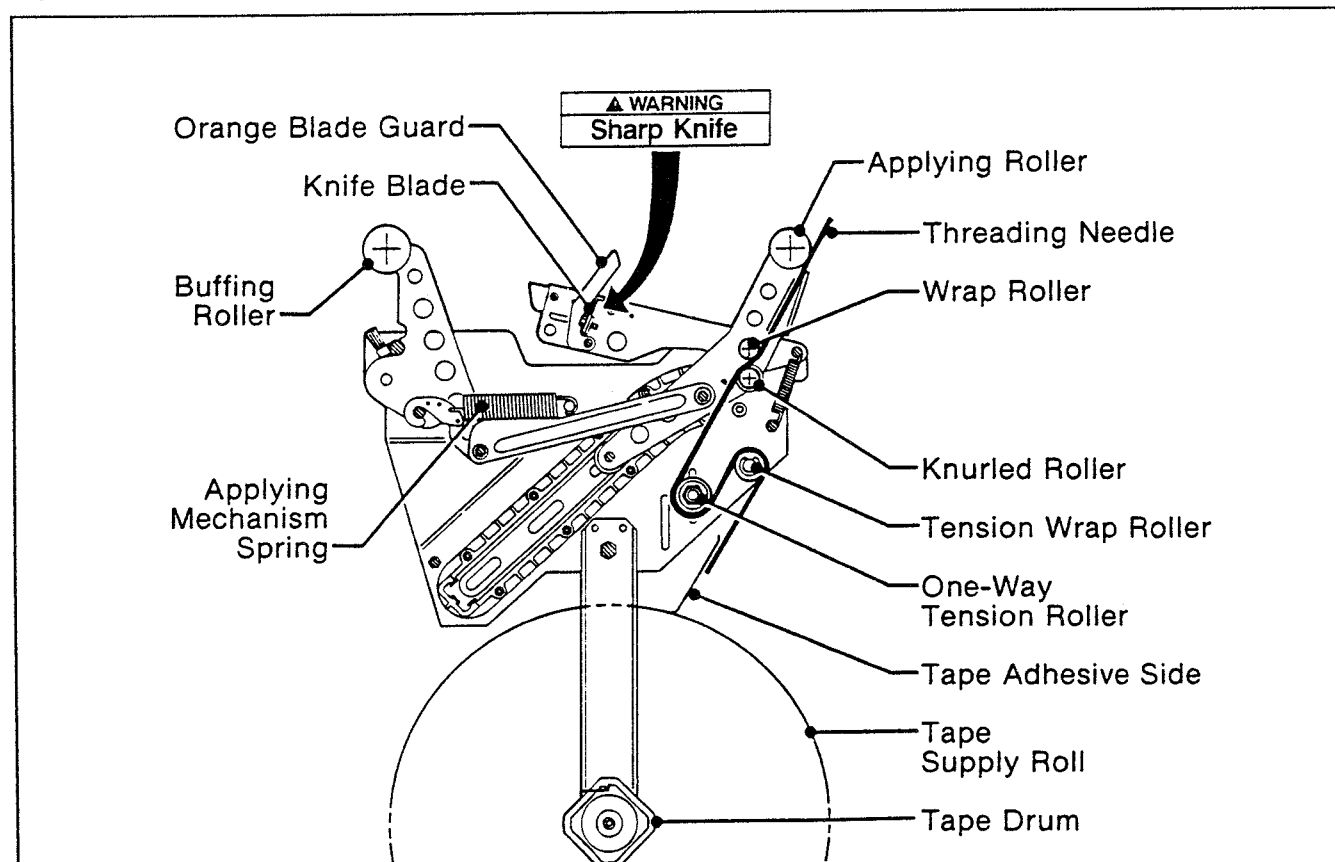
A - Tape Threading Diagram - Bottom Taping Head - Left Side View
